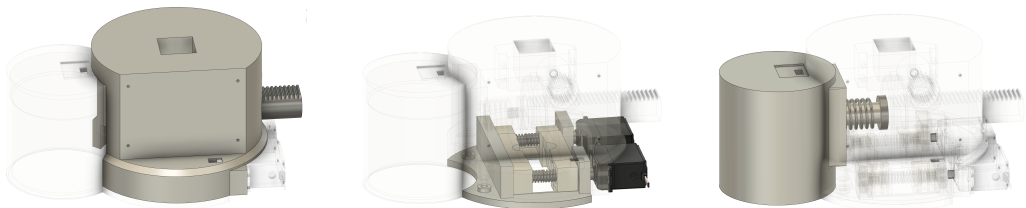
Right; Main housing, center; Wing nut assembly, Left; Filter house
